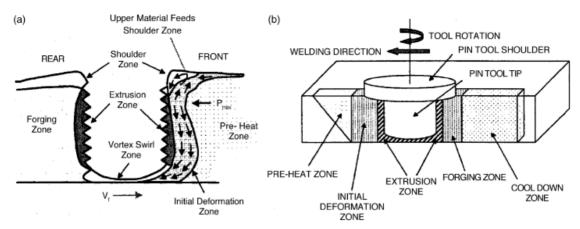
Metal flow pattern(a) and metallurgical processing zones(b) during friction stir welding(FSW)
